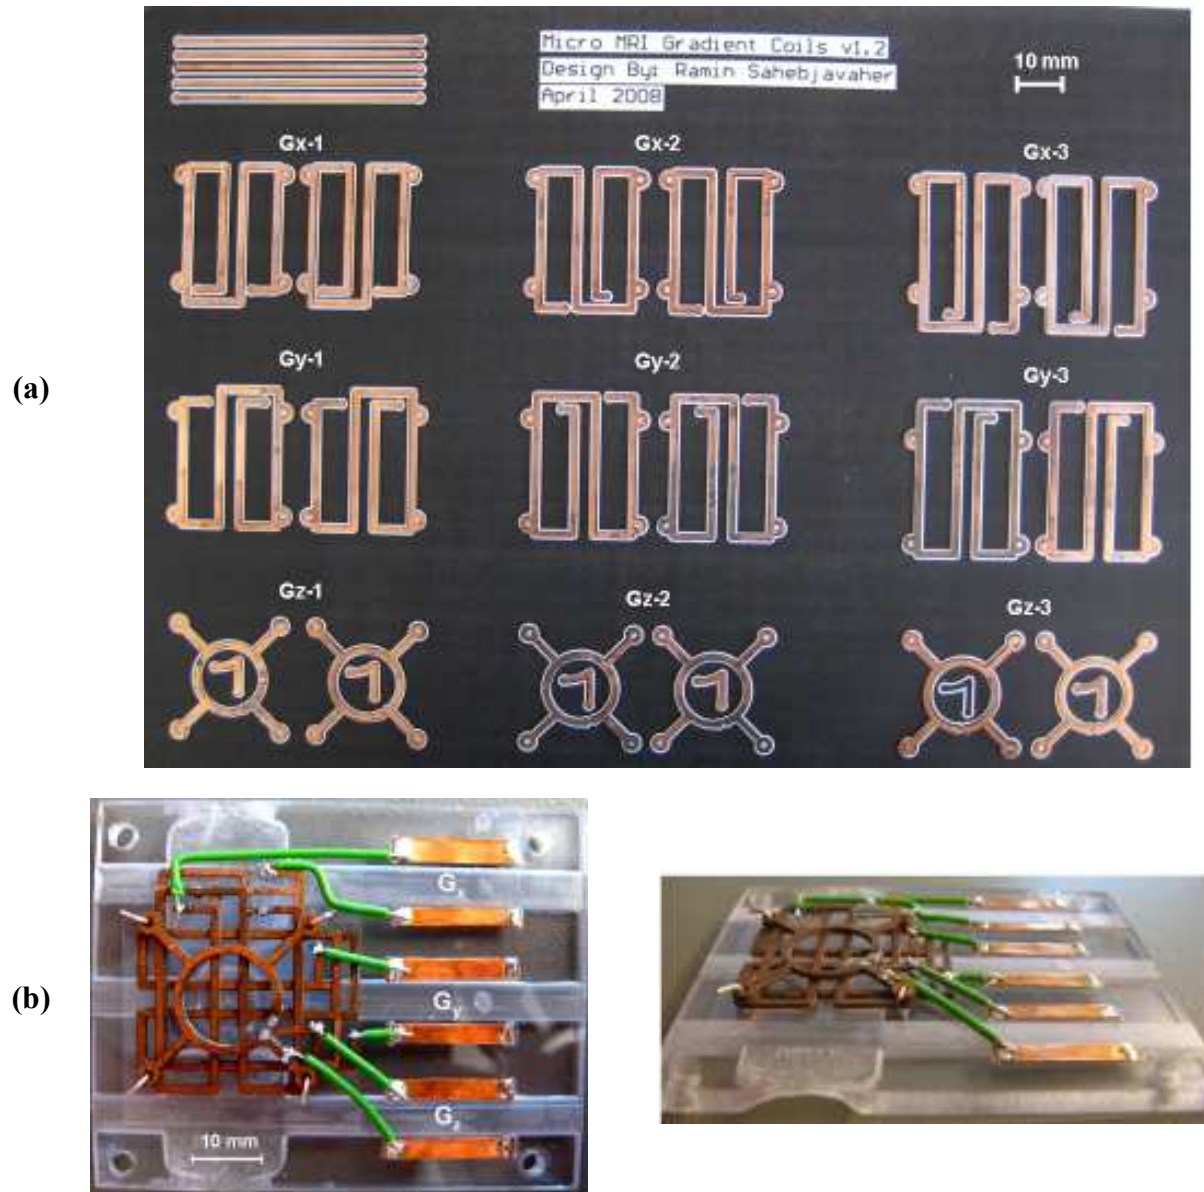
Photograph of the fabricated (a) and the assembled (b) gradient coils (only the top piece of the insert is shown).
